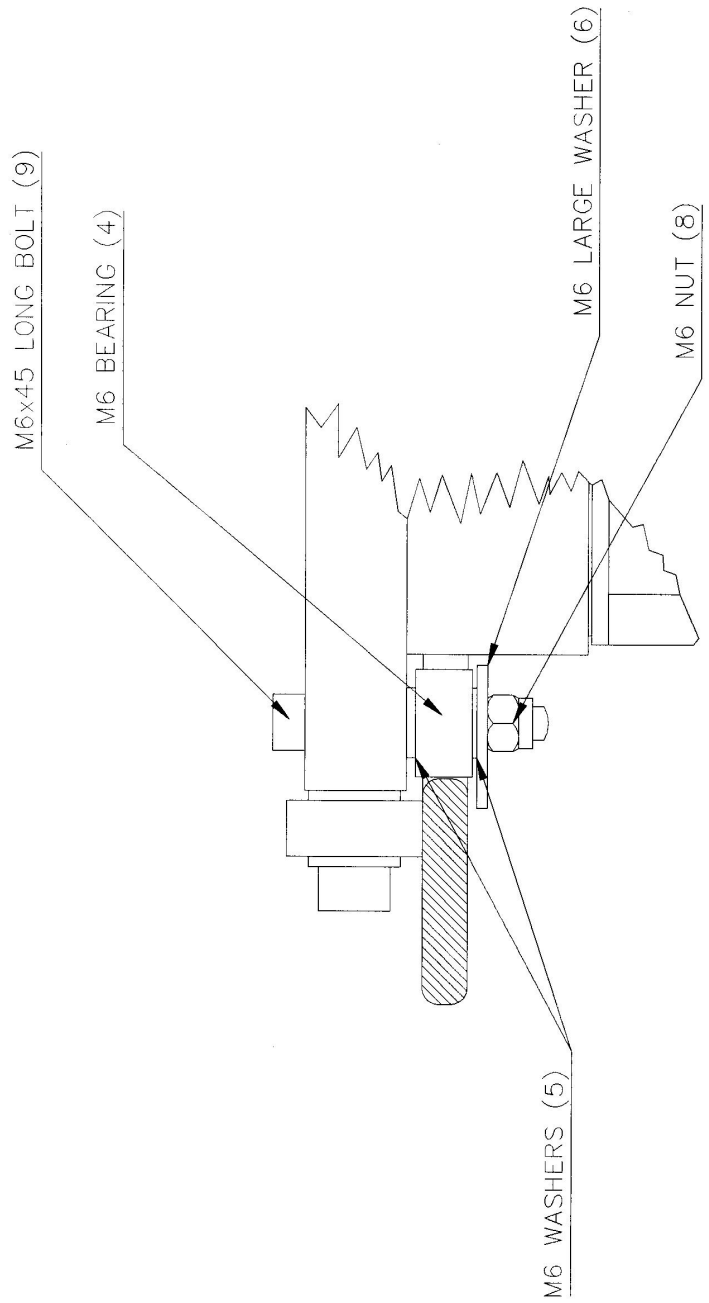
HORIZONTAL BEARING ASSEMBLY.
